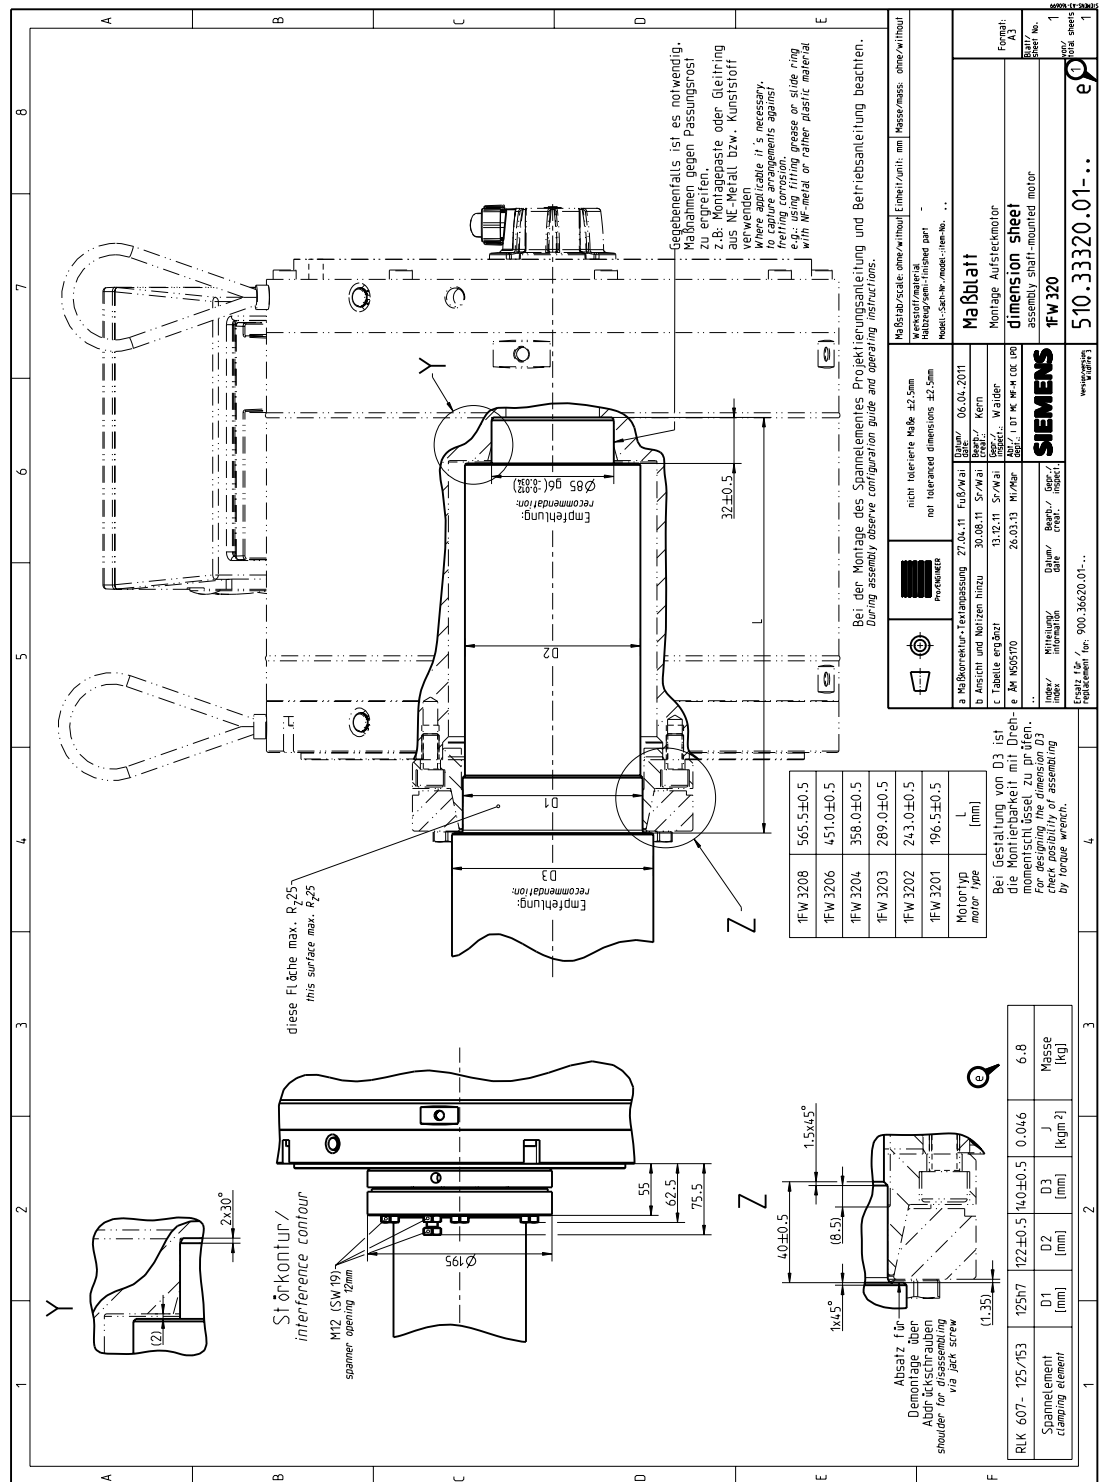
Dimension drawing, mounting plug-on motor 1FW320
